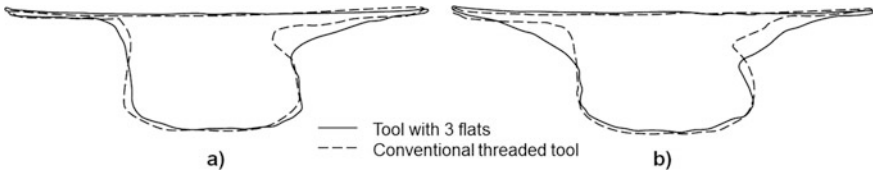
Superposed stir zone regions in FSW lap joints made with different tools and produced at a 1200 rpm and 152 mm/min (0.13 mm/rev); and b 800 rpm and 254 mm/min (0.32 mm/rev)
